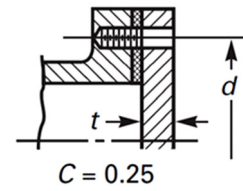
Flat head selection : circular covers bolted with a full-face gasket to shells, flanges or side plates
